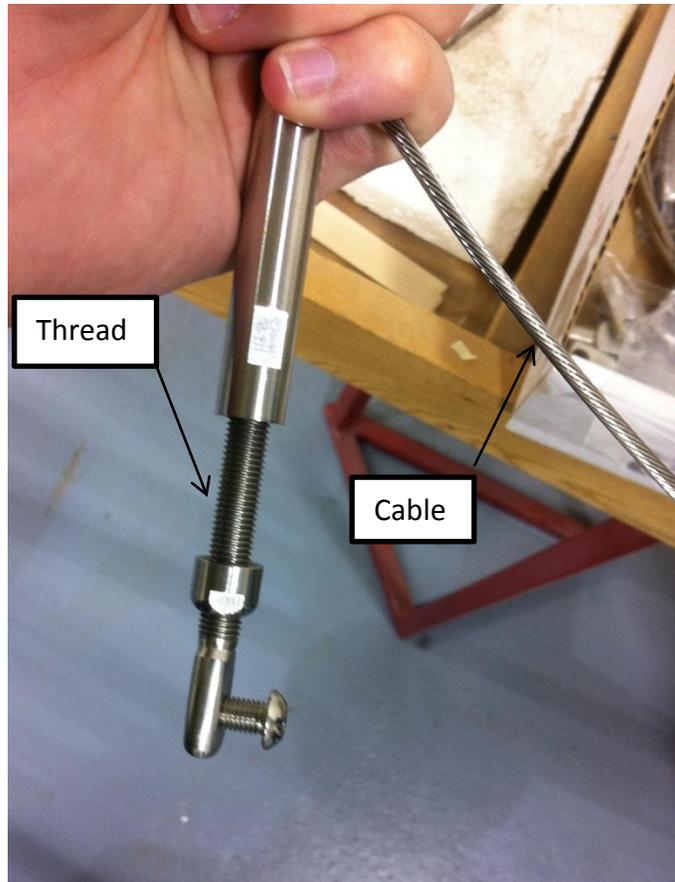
Small Piece to Attach the Cross Cable to the Fixture [4]
